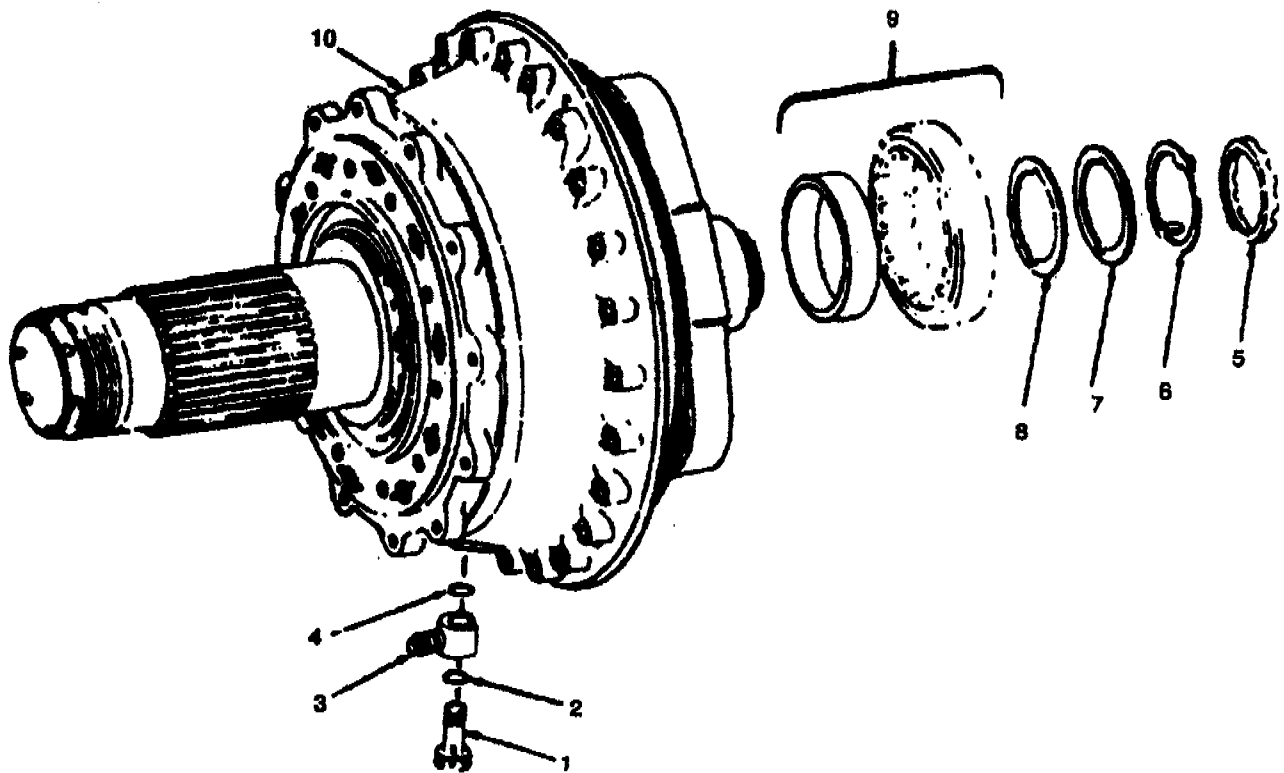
Reduction Gear Assembly (T53-L-15) (Sheet 1 of 2).
